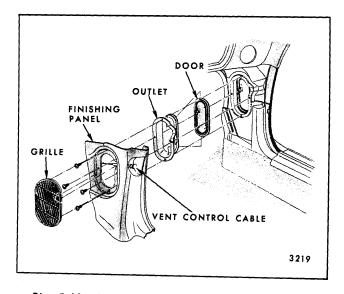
Shroud Side Finishing Panel and Air Duct Outlet - "Z-67" Style
